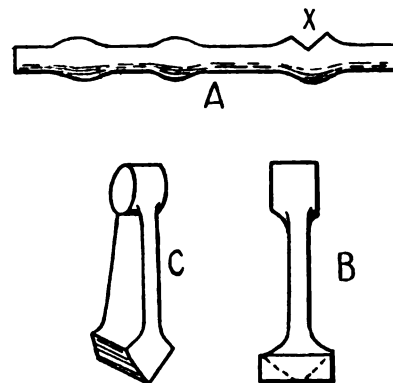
FORGING LIFTING SHAFT FROM OLD AXLE.
